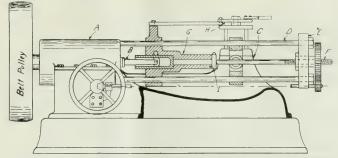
SHELL BORING MACHINE BUILT FROM GASOLINE ENGINE PARTS.
